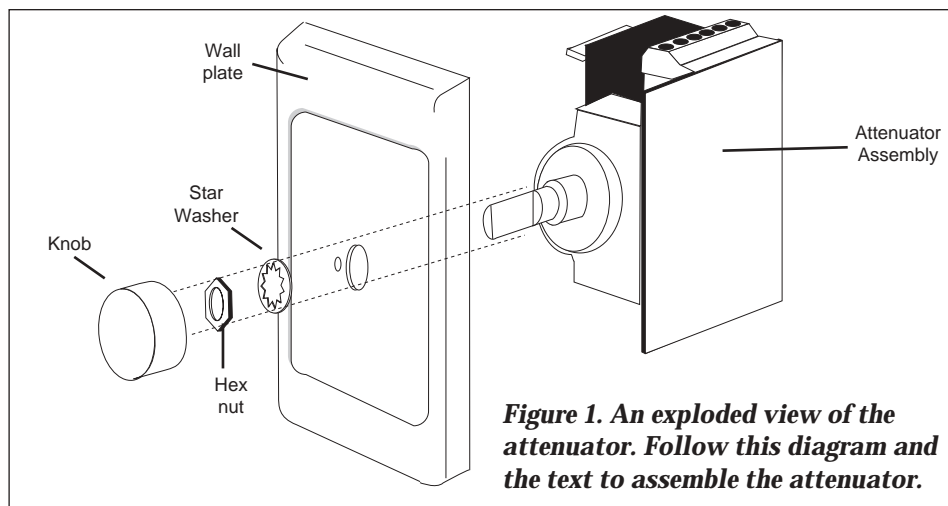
An exploded view of the attenuator. Follow this diagram and the text to assemble the attenuator.
